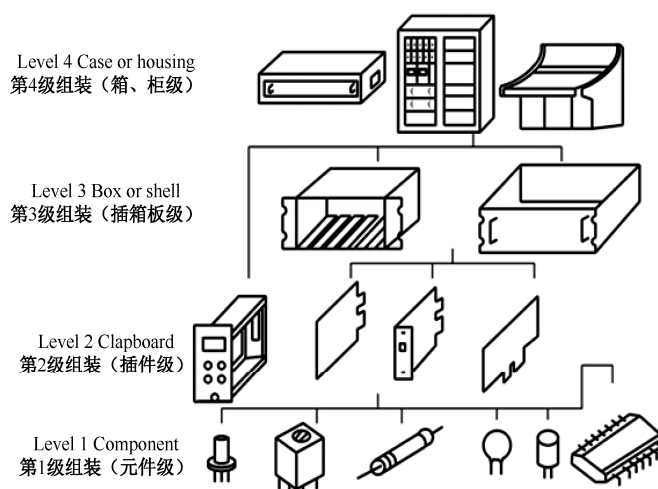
Sorting The Complete Machine 整机装配顺序
